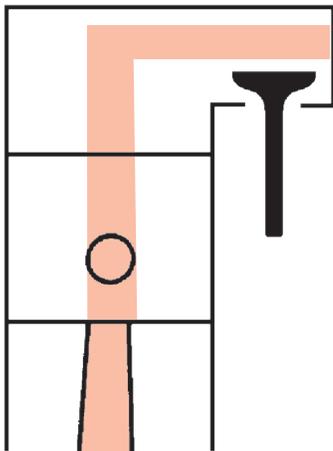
FIGURE A An L-head, or flat-head, engine has the valves in the block.
